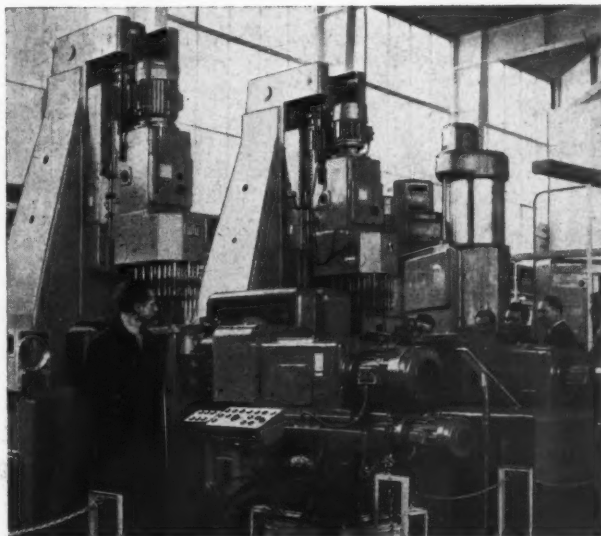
General view of a 3-station transfer machine for drilling and tapping operations on cast aluminium tractor gearboxes, and on certain cover castings. Standard unit heads and other components are employed
